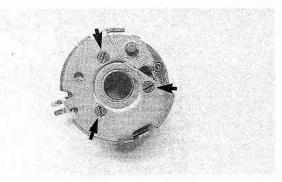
Impulse coil mounting screws on underside of distributor base plate (arrows).
